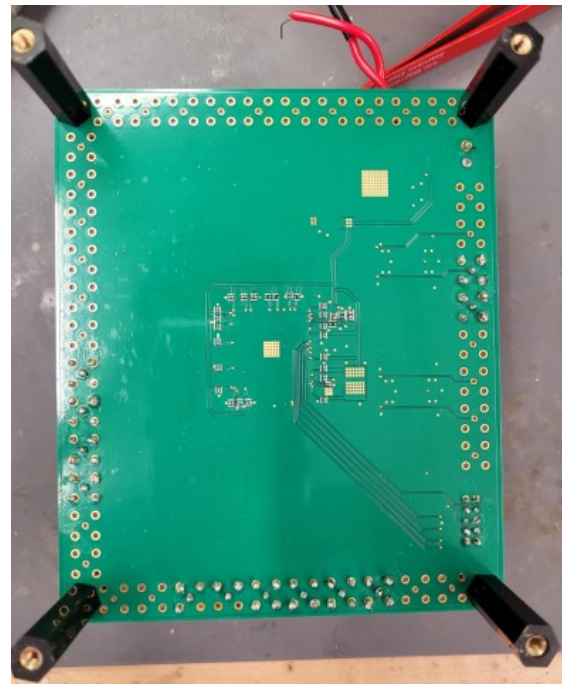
FPGA chip, Decoupling Capacitors, and Oscillator being soldered to the Board.
